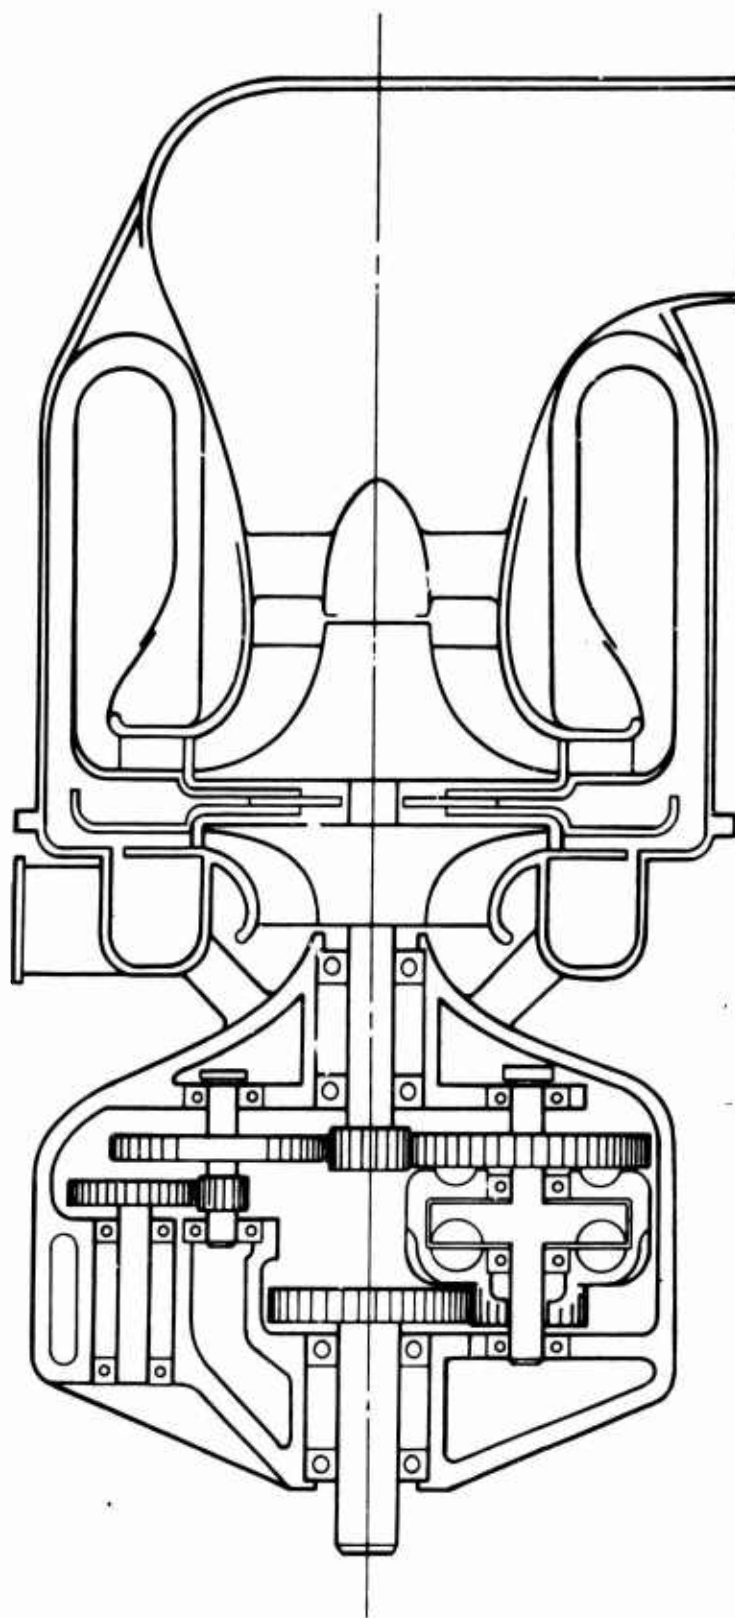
Single-Shaft APU for Bleed and Shaft Power, With Fluid Coupling.
